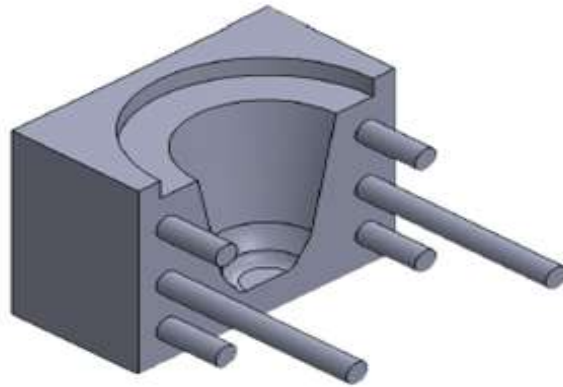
(b): 3D Model of the Second Half of the Two Piece Mould
